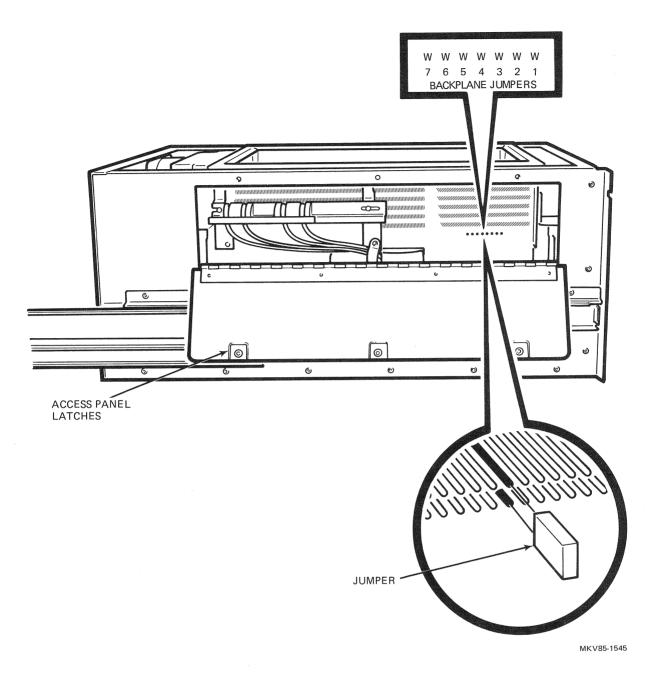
CIPA Mounting Box - Backplane Jumpers
